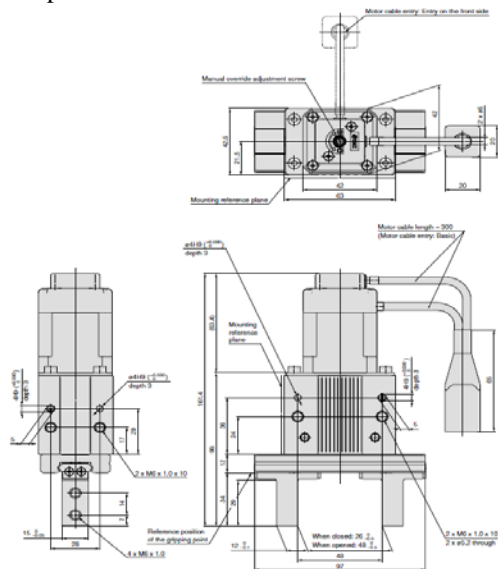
Overall and functional dimensions of the LEHZ 32- K2-22 gripper subassembly
